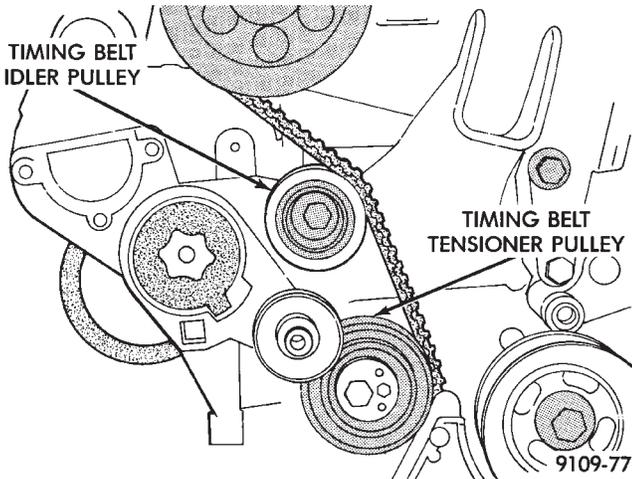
Power Steering Pump Bracket and Timing Belt Idler Bolt
